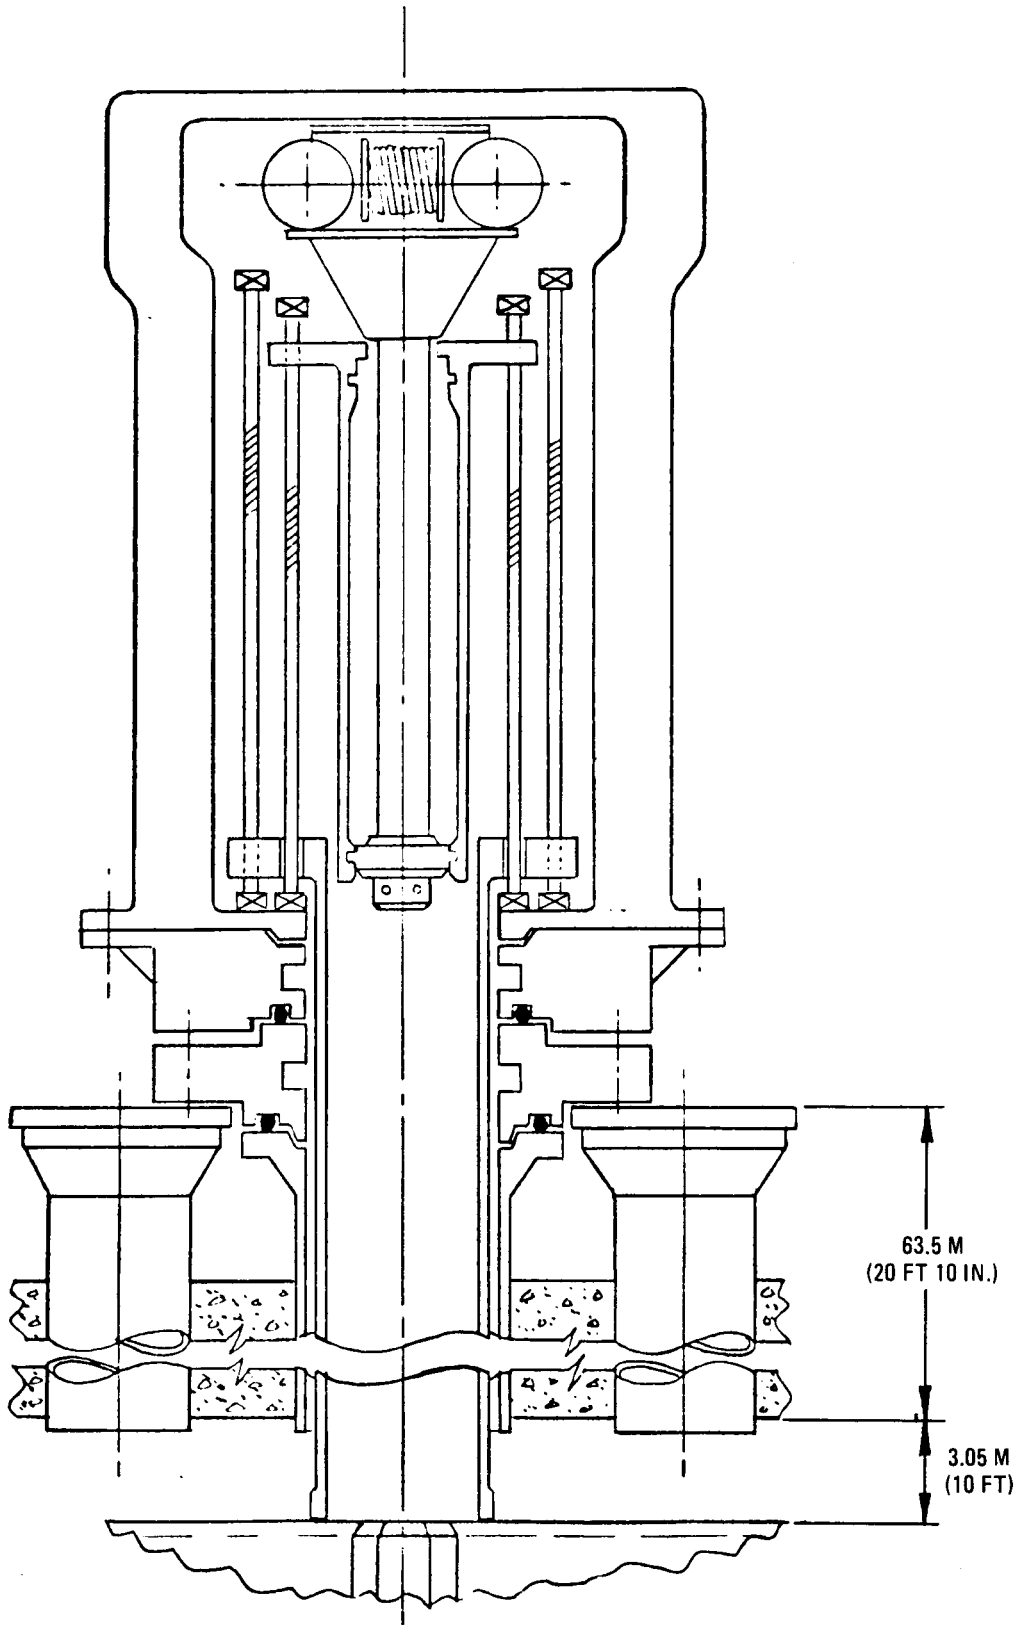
Fuel handling machine with restraint sleeve extended
